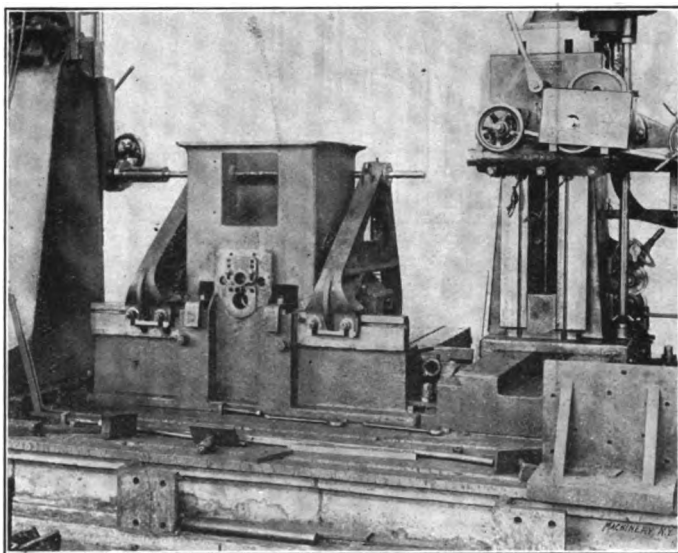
Large Drilling and Boring Jig for Machine Beds.
